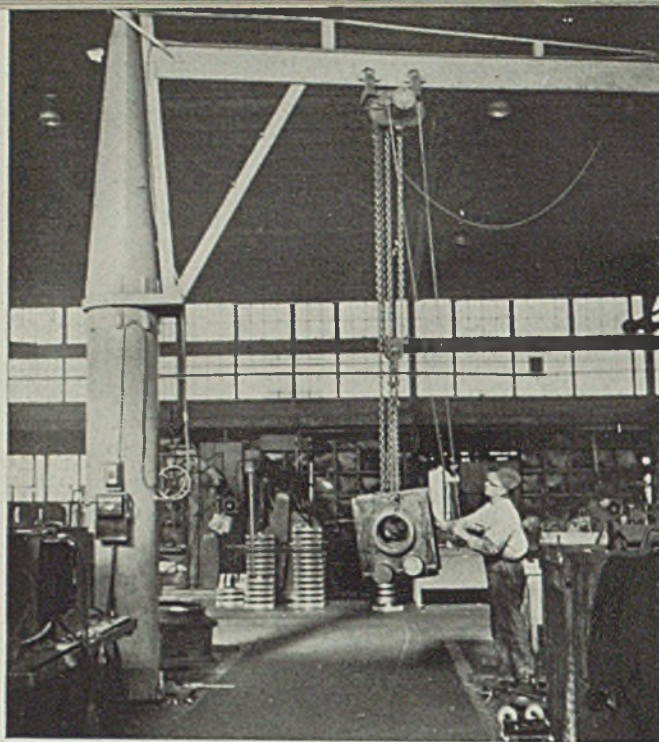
Lower edge of here is only 25 inches low top of overhead crane which passes over this
